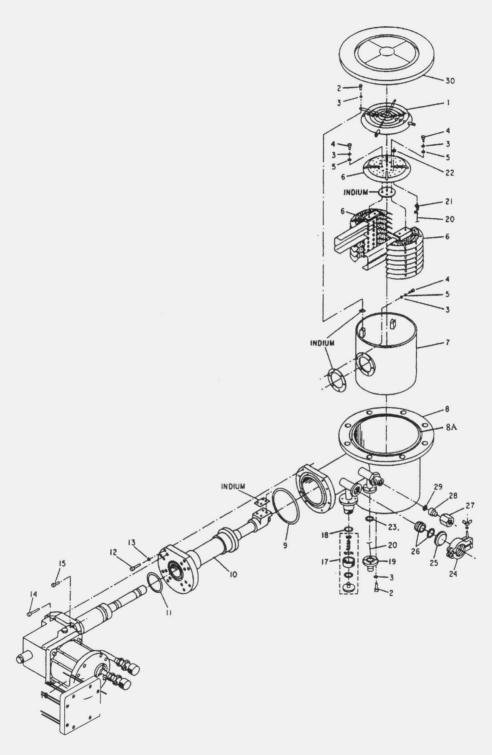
Exploded View of Cryo-Torr 8F Cryopump
